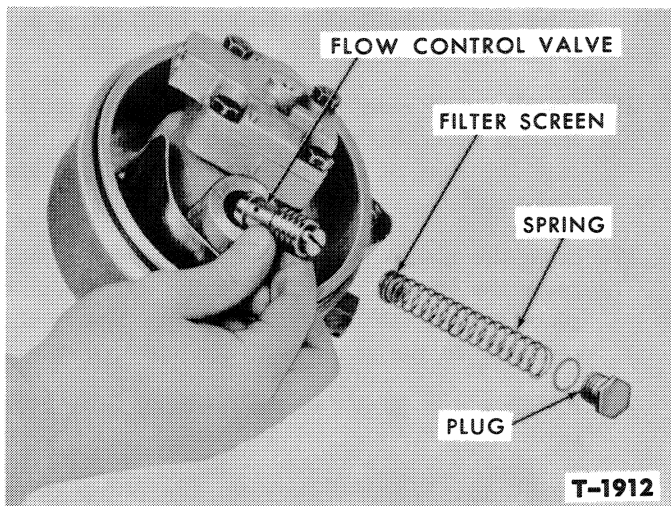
Installing the Flow Valve, Spring, and Retainer Fitting
